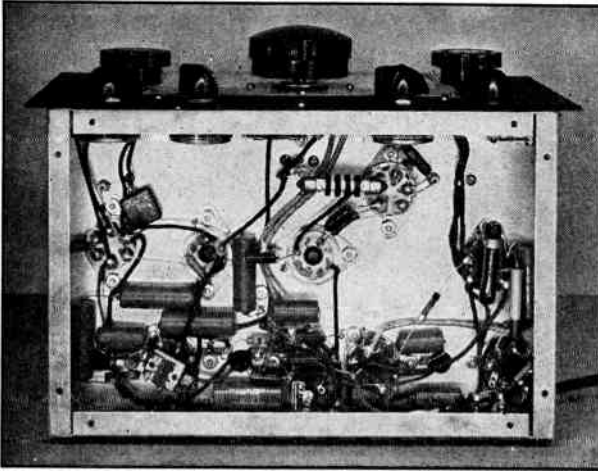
The below-chassis wiring is shown in this view of the 7-tube regenerative single-signal receiver.
